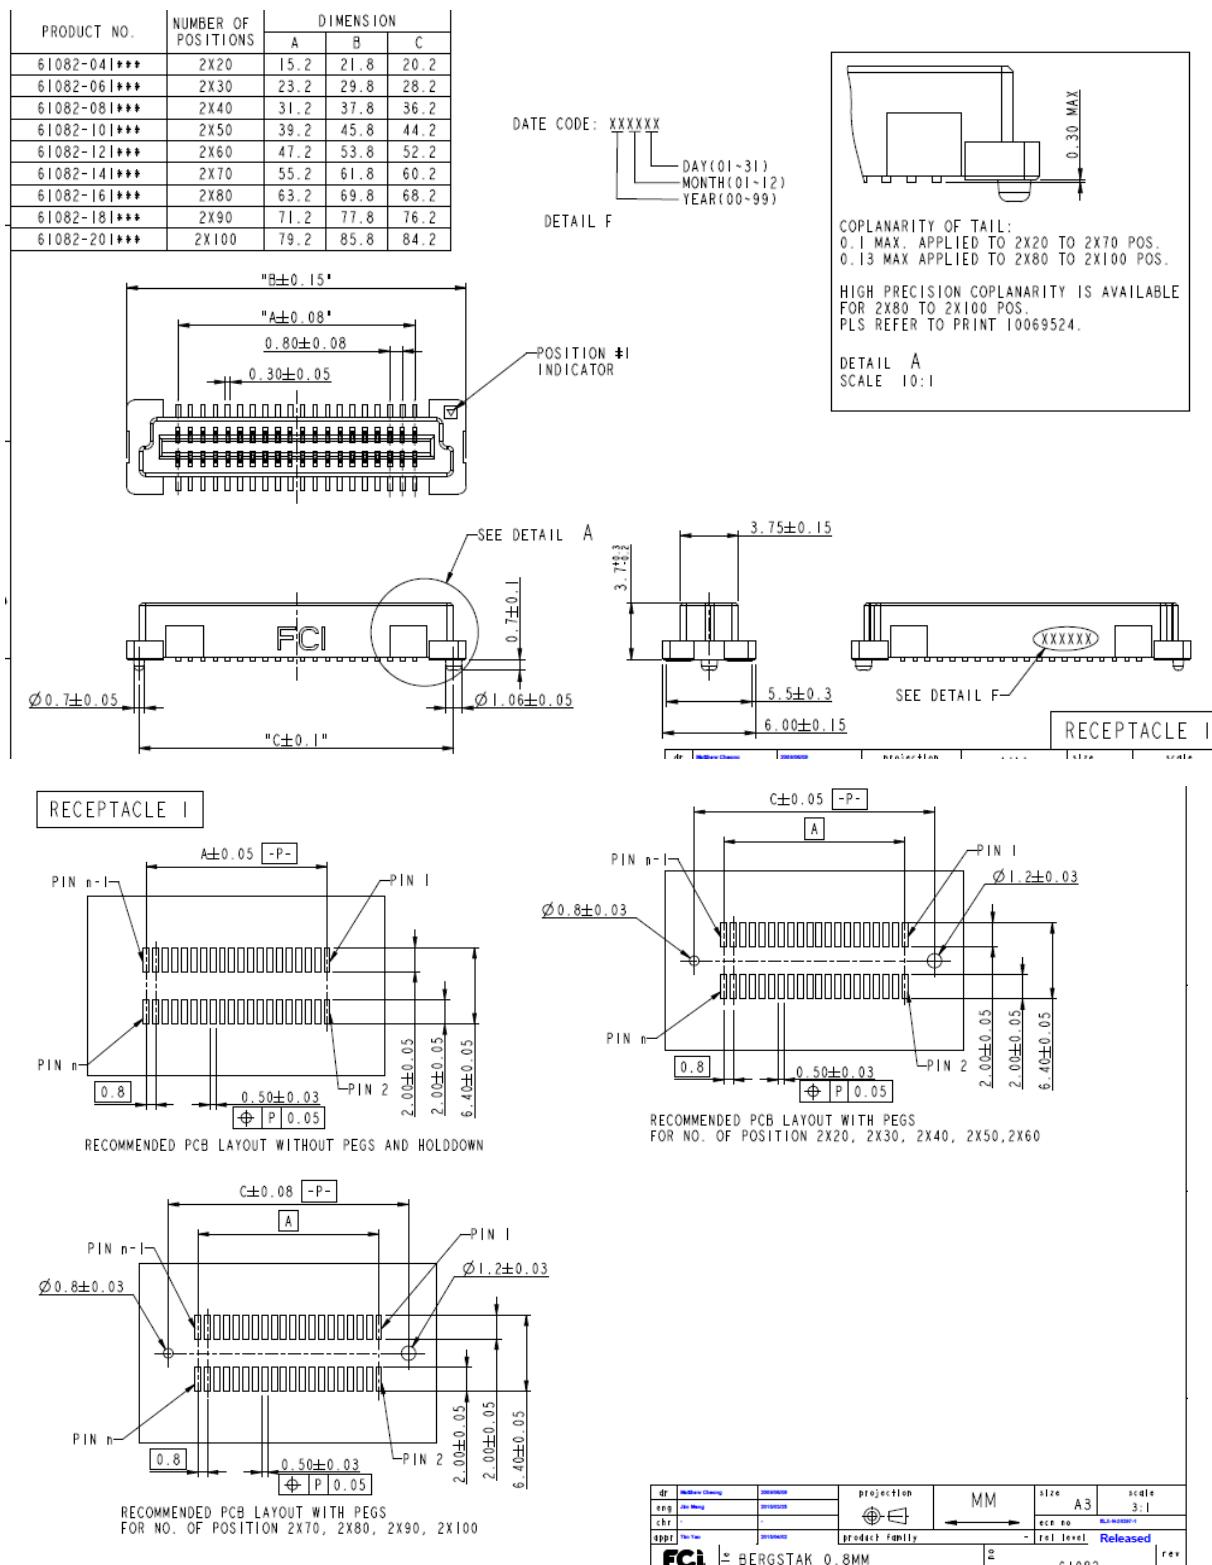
Pitch 0.8mm Vertical Double Row 80 PIN PCB Package
